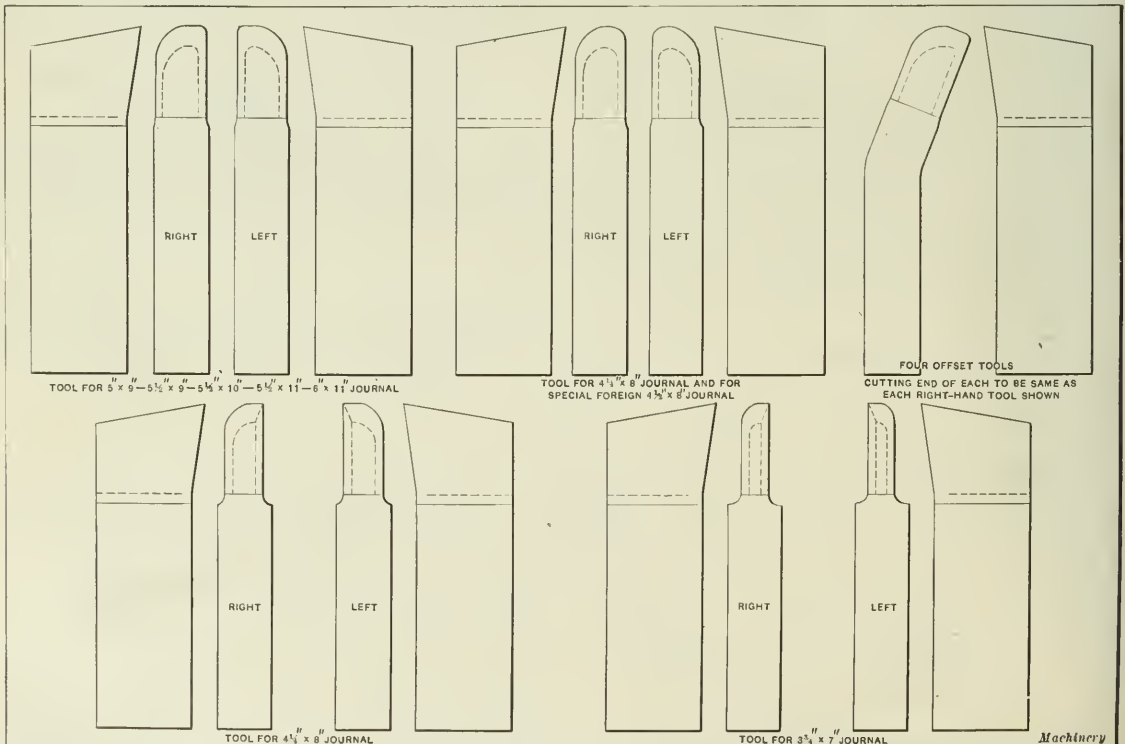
Turning Tools for Journals and Wheel Seats (One-fourth Size)
